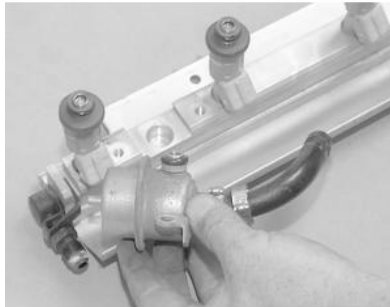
Remove the O-ring from the pressure regulator port; install a new O-ring during assembly
